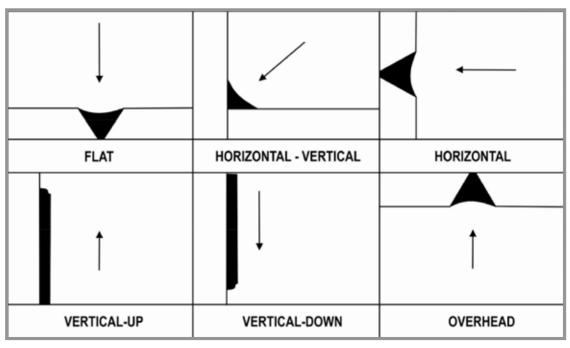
Welding Directions or Positions
